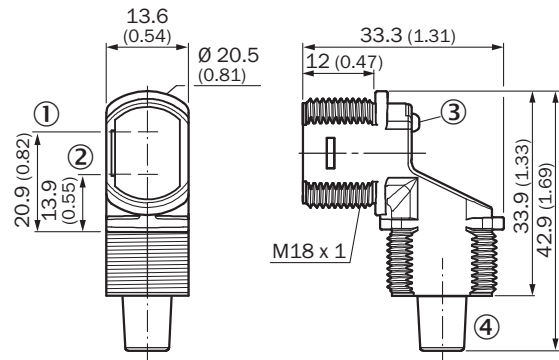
ZLx18-4xxxx / ZLx18-Dxxxx, cable
